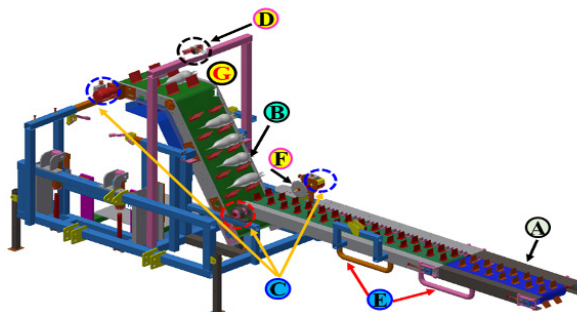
3D model of the radish collector under development (A) stem-cutting conveyor, (B) transfer conveyor, (C) hydraulic motors, (D) DC winch motor, (E) furrow guides, (F) stem-cutting blade, and (G) transportation joint.
